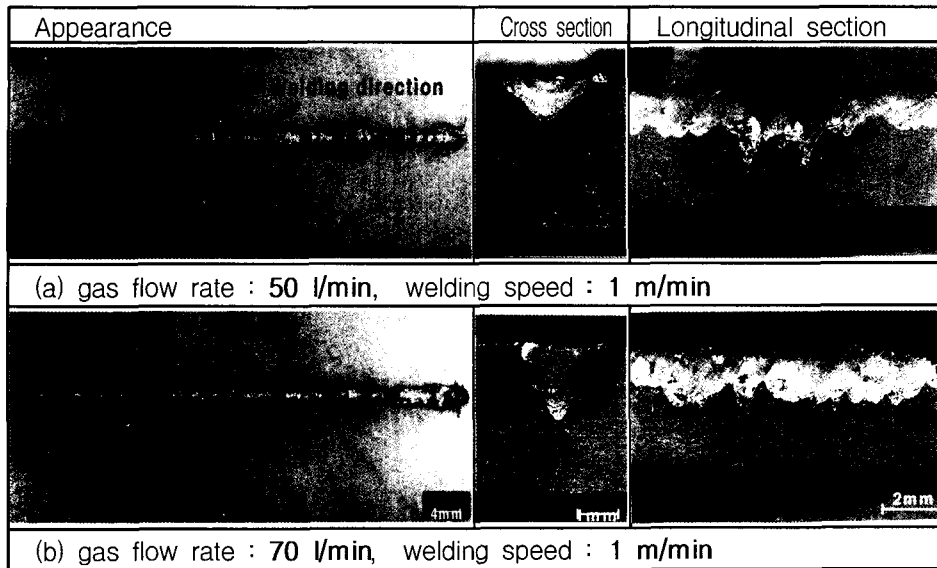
Appearance and shapes of bead with gas flow rate in A5083 alloy welded by 3kw laser power and He shield gas.
